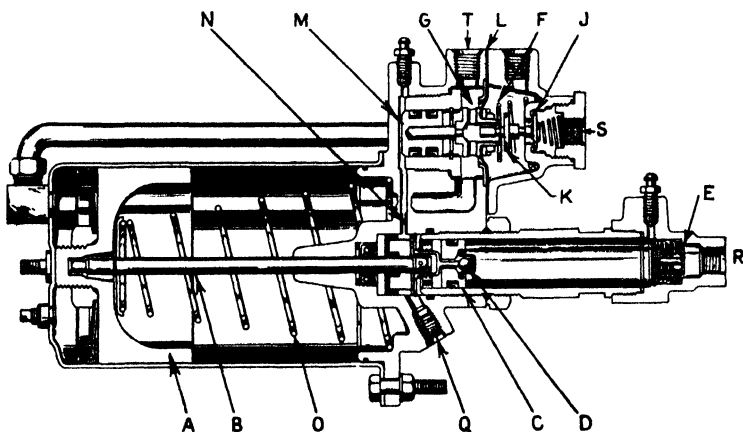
BENDIX AIR-PAK UNIT IN SECTION.
